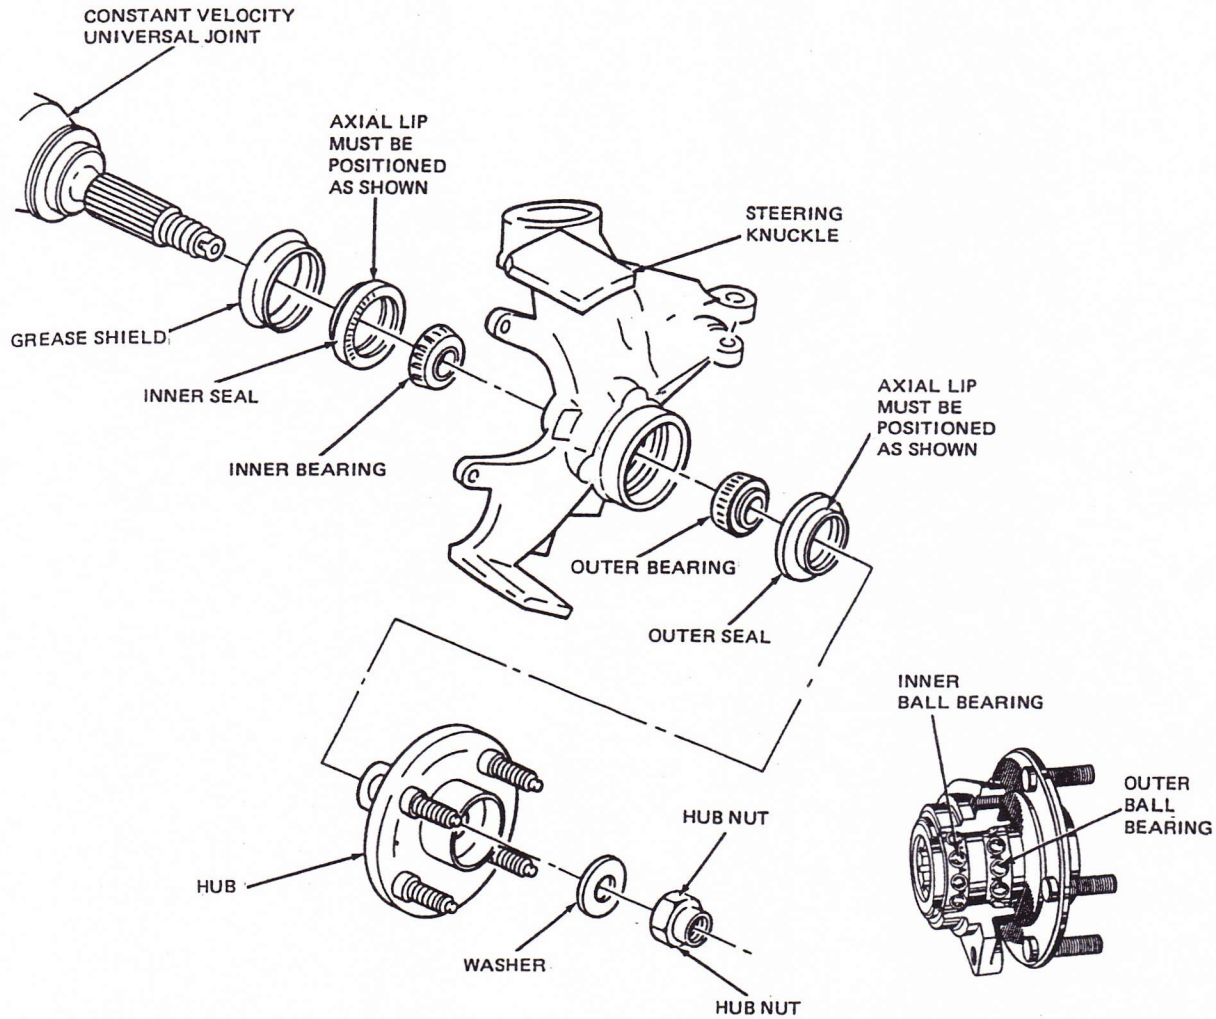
Front Wheel Drive Wheel Hub and Bearing Assemblies. (a) Wheel hub and bearings. (Courtesy of Ford Motor Company); (b) permanently sealed and lubricated front wheel ball bearings. (Courtesy of General Motors of Canada, Limited)
